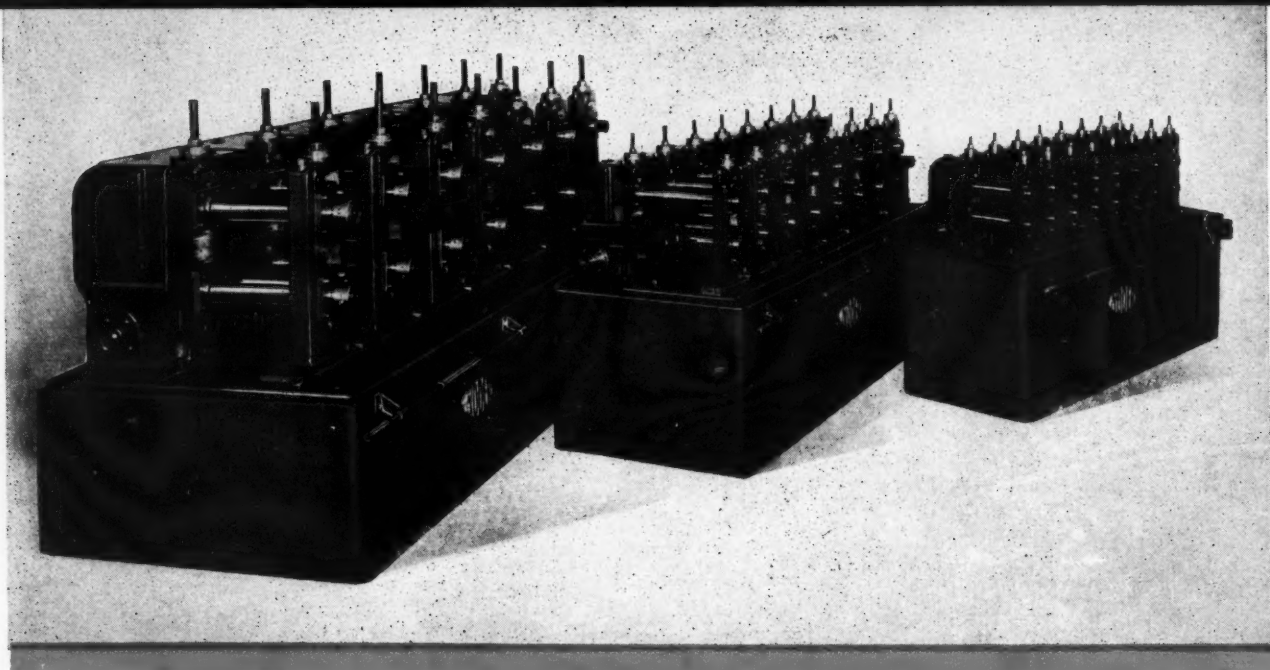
Standard Roll-forming Machines, Consisting of a Base on which are Mounted Supports for the Spindle Bearings, which Vary in Size, Number, and Type on Machines of Different Capacities
